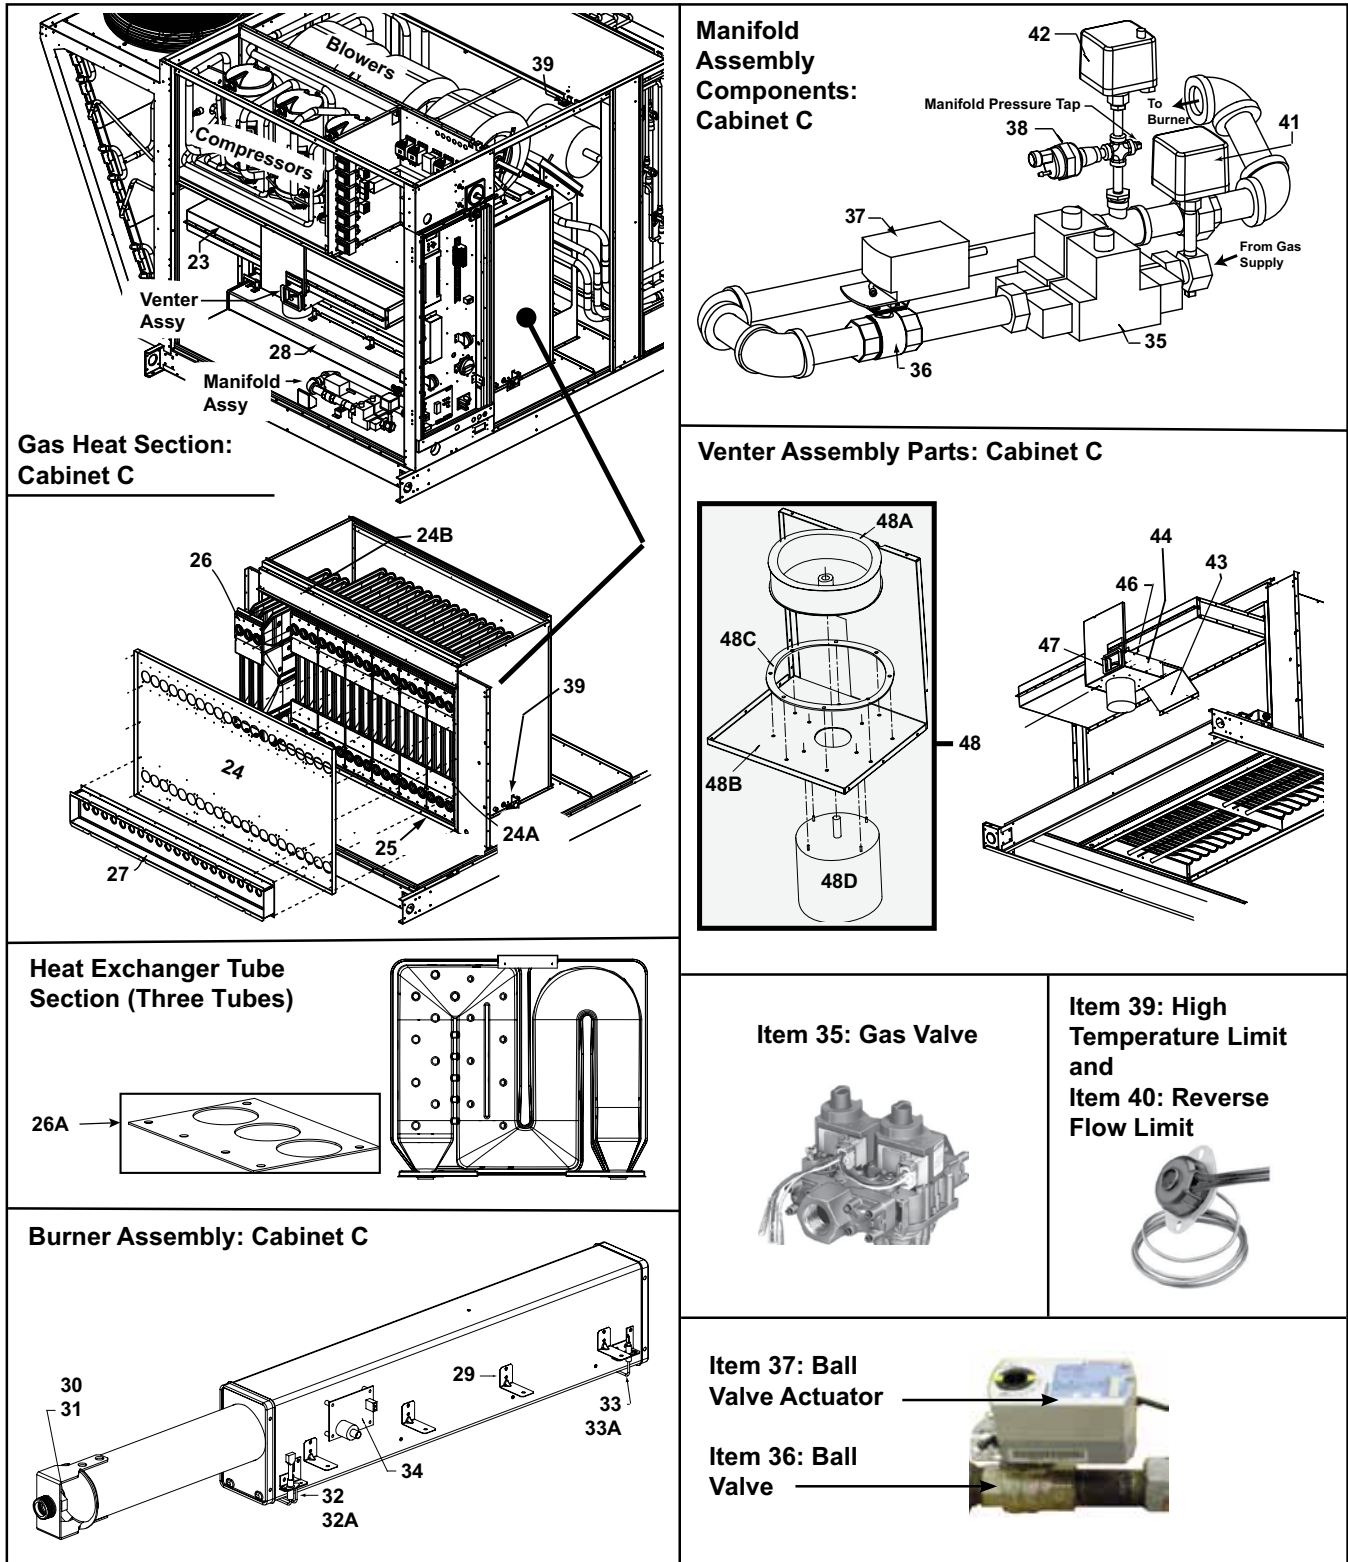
Cabinet C Gas Heat Section and Components (Refer to [Table 41](#))
